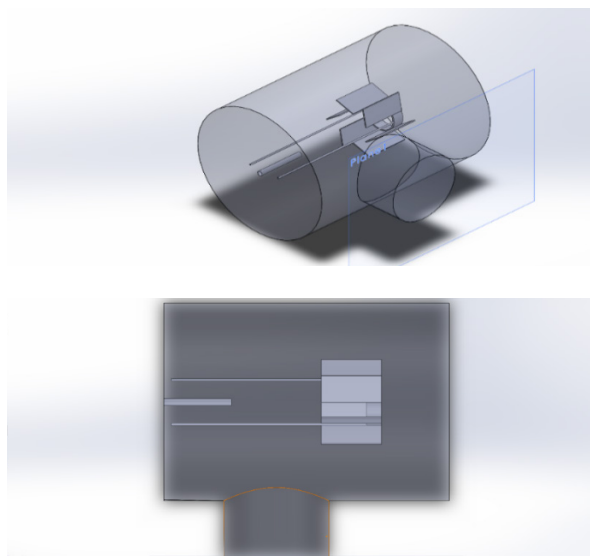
The burner geometry. (a) Isometric View (b) sectional view.
